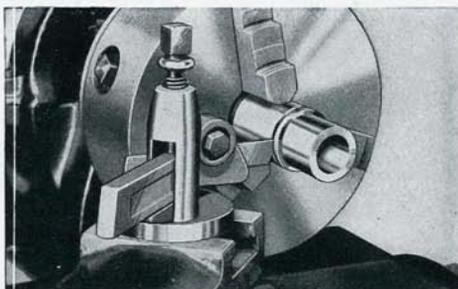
Making a Replacement Bushing Complete Without Removing from Lathe Chuck
